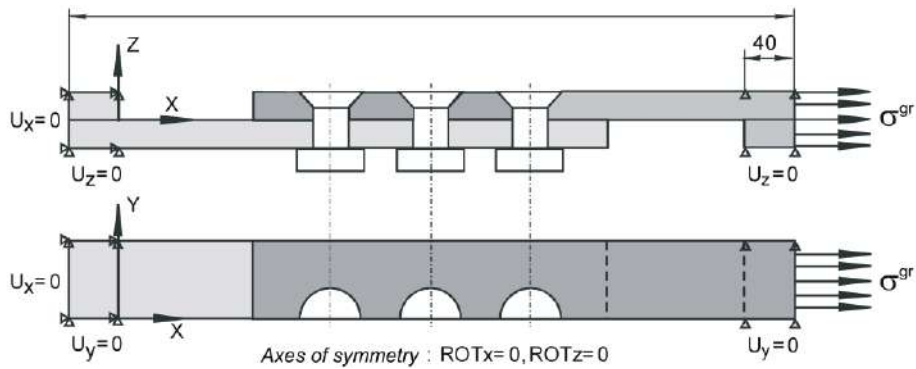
Design diagram of single-shear three-row riveted joint
